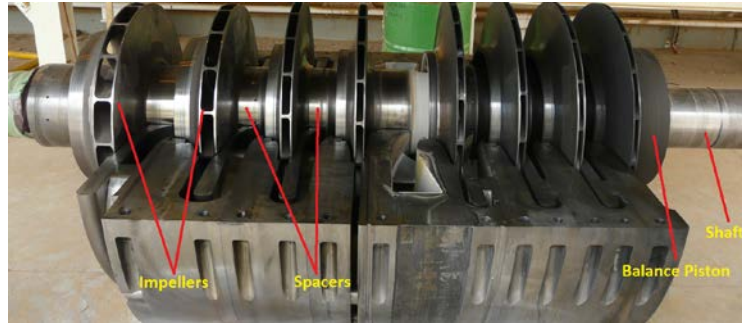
42 Rotor Assembly Harweel, PDO 2014
